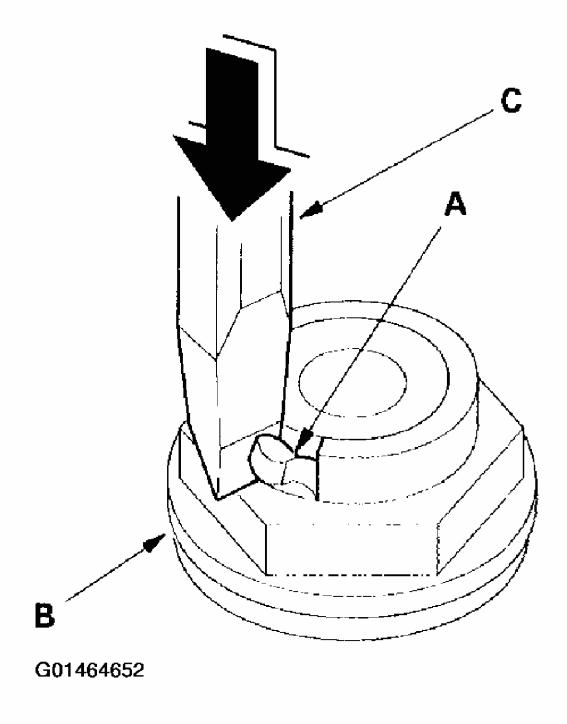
Cutting The Lock Tabs Of Each Shaft Locknut Courtesy of AMERICAN HONDA MOTOR CO., INC.
